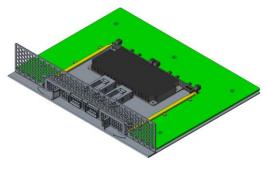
Large Form Factor NIC Chassis Mounted 3D Views
